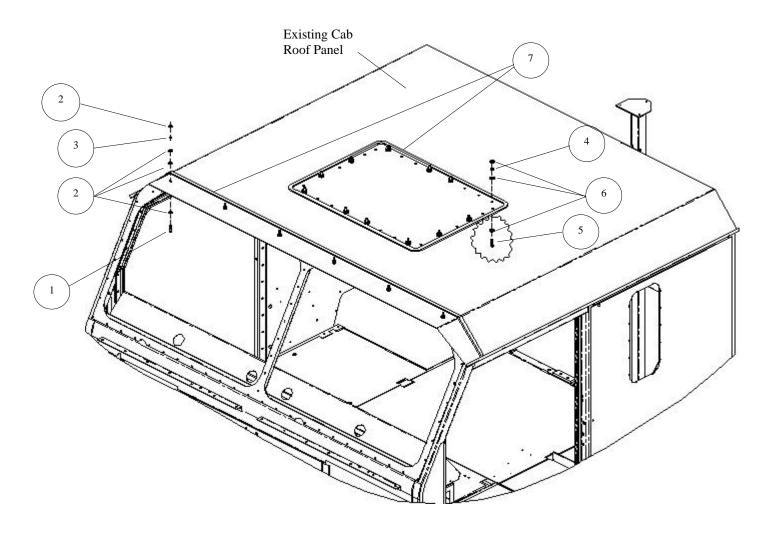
Roof Panel Mounting Studs and Spacers Installation.
